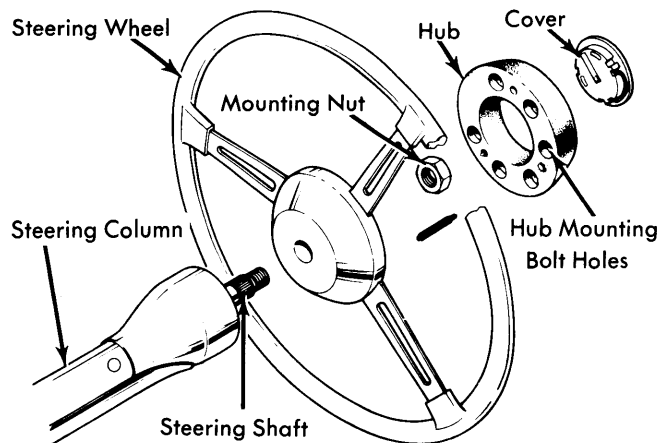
Spitfire Steering Wheel Components, Others Similar
